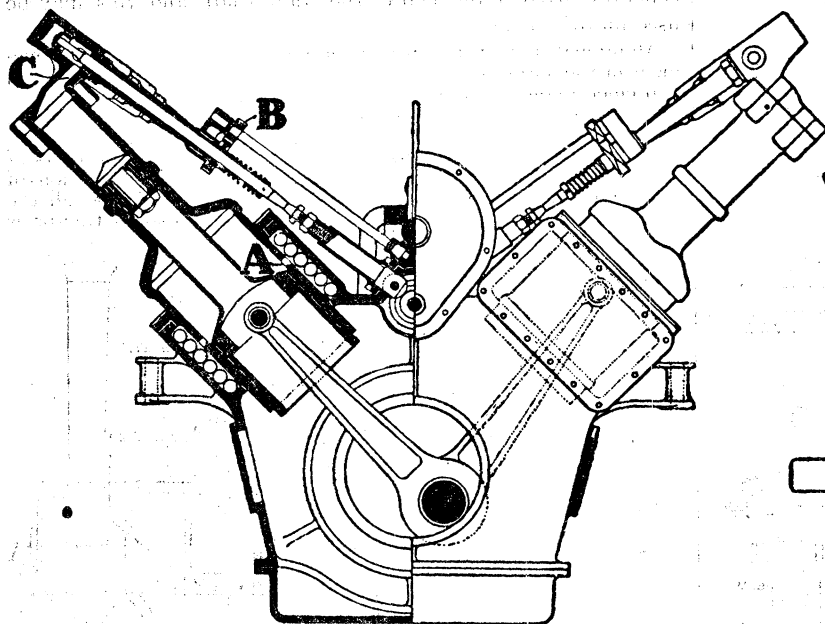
The Bentley Eight-cylinder Diagonal Tandem-compound Superheated-Steam Engine.
